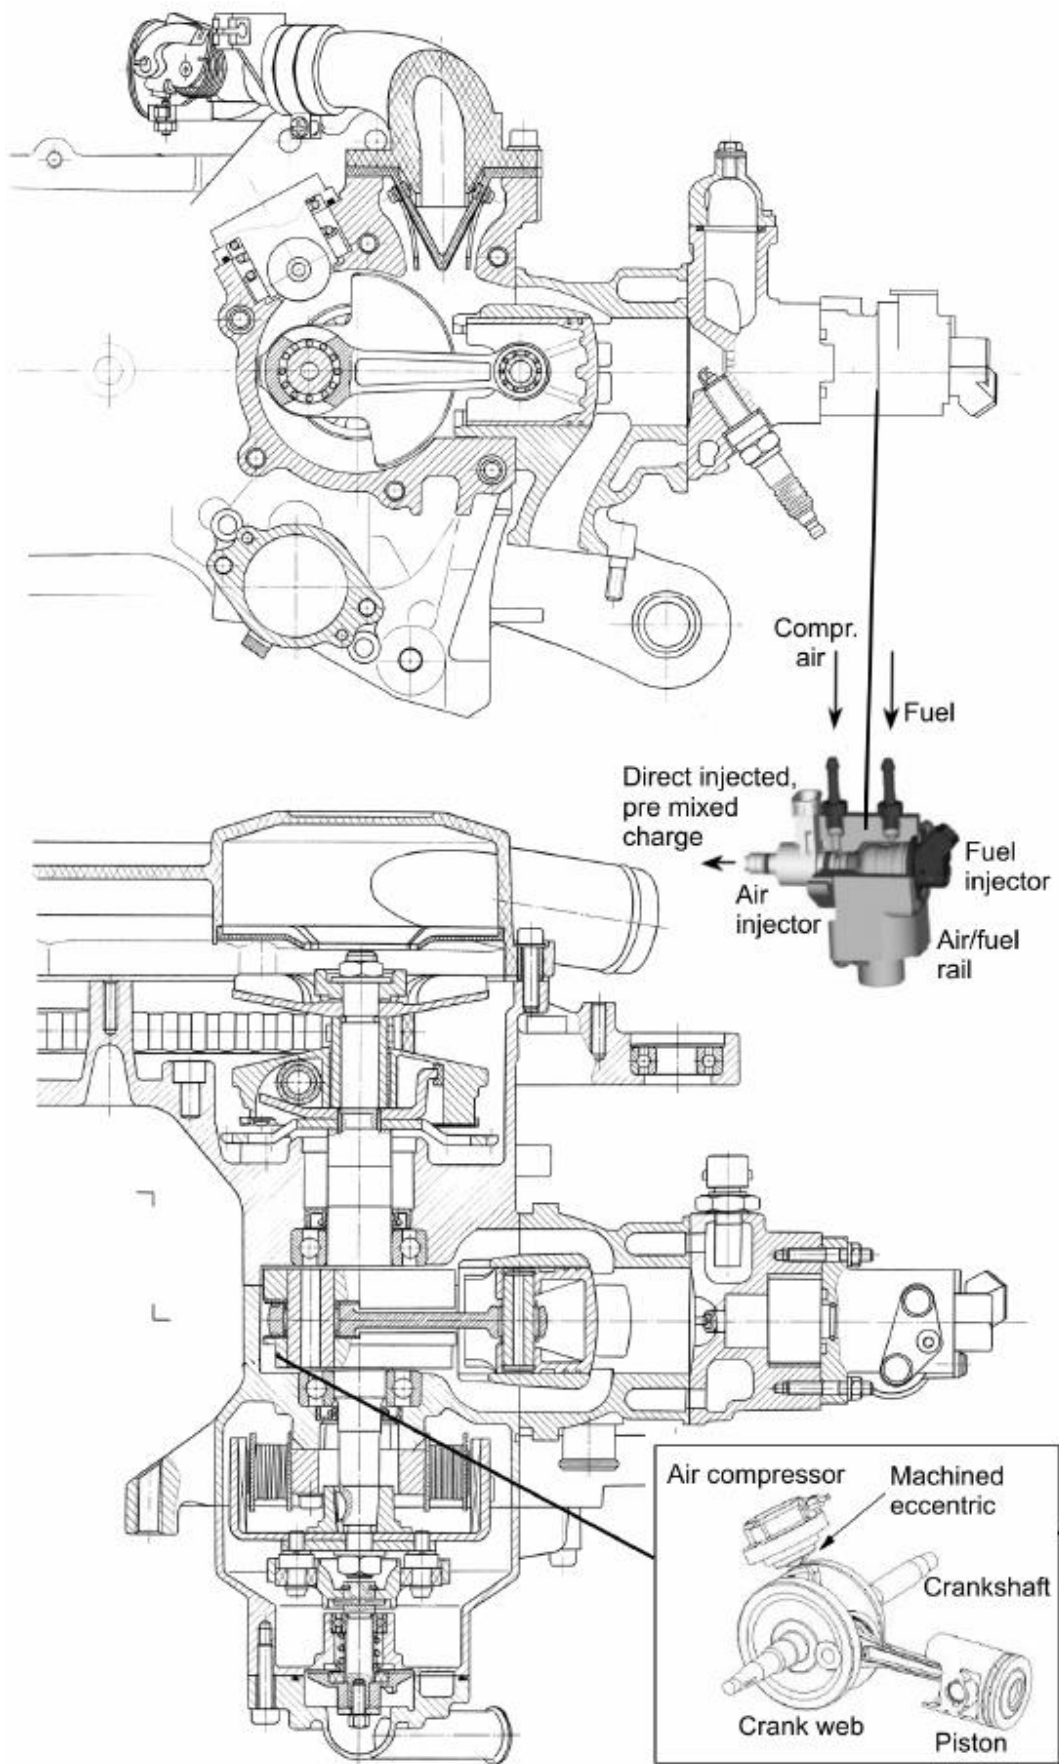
Sectional drawing of the 50 cm³ Aprilia DITECH [88, p. 432]
